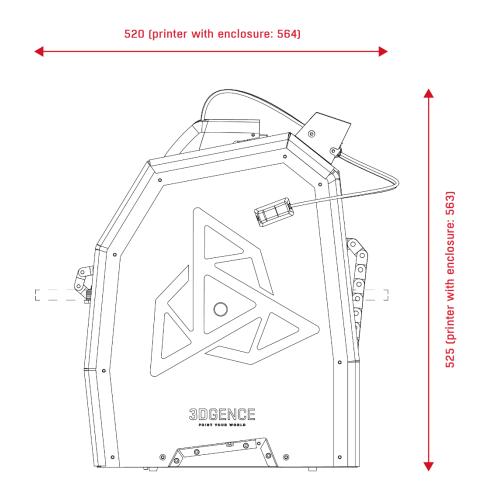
The maximum dimensions of the printer taking into account the extreme positions of the heatbed – right side view
